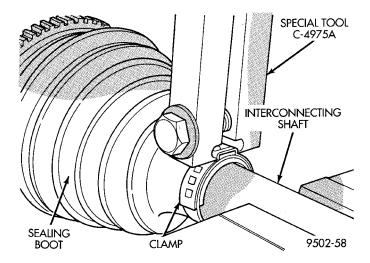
Crimping Tool Installed on Sealing Boot Clamp
